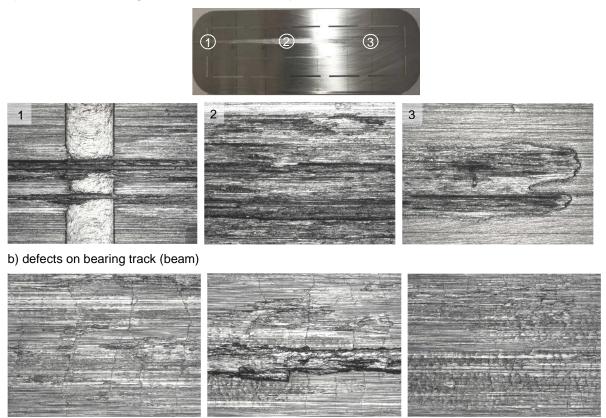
Defects after 8 crash simulations on air bearing (Type 1) and beam surface
